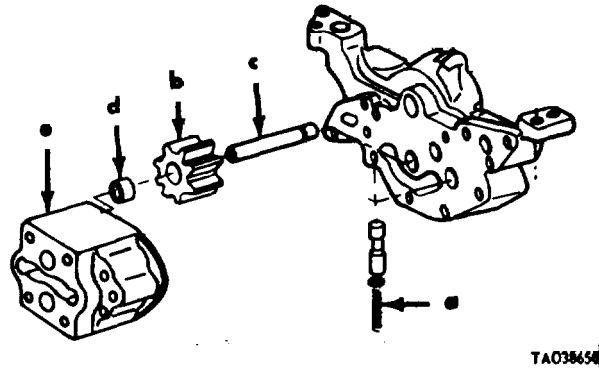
Oil pressure regulator and oil pump-points of measurement.
